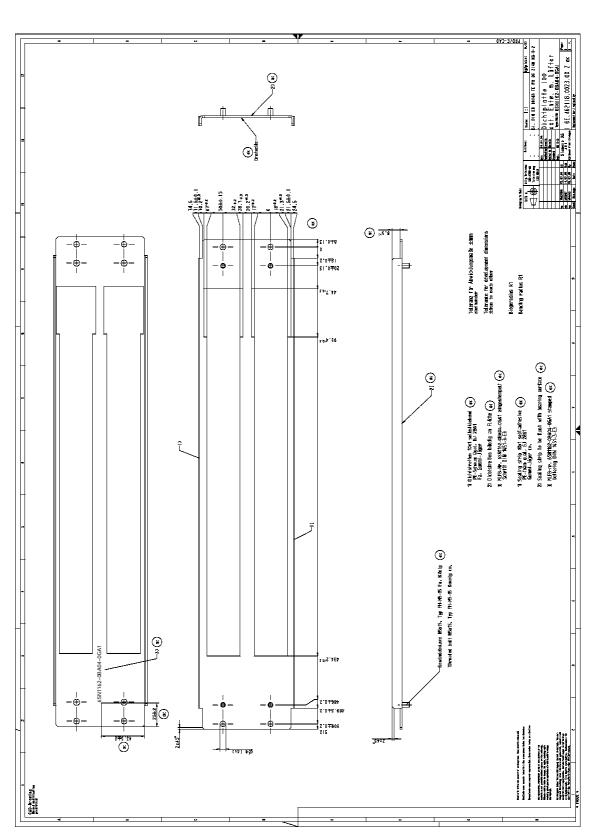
External cooling, mounting frame for cabinet installation module width 100 mm, 6SN1162-0BA04-0GA1
